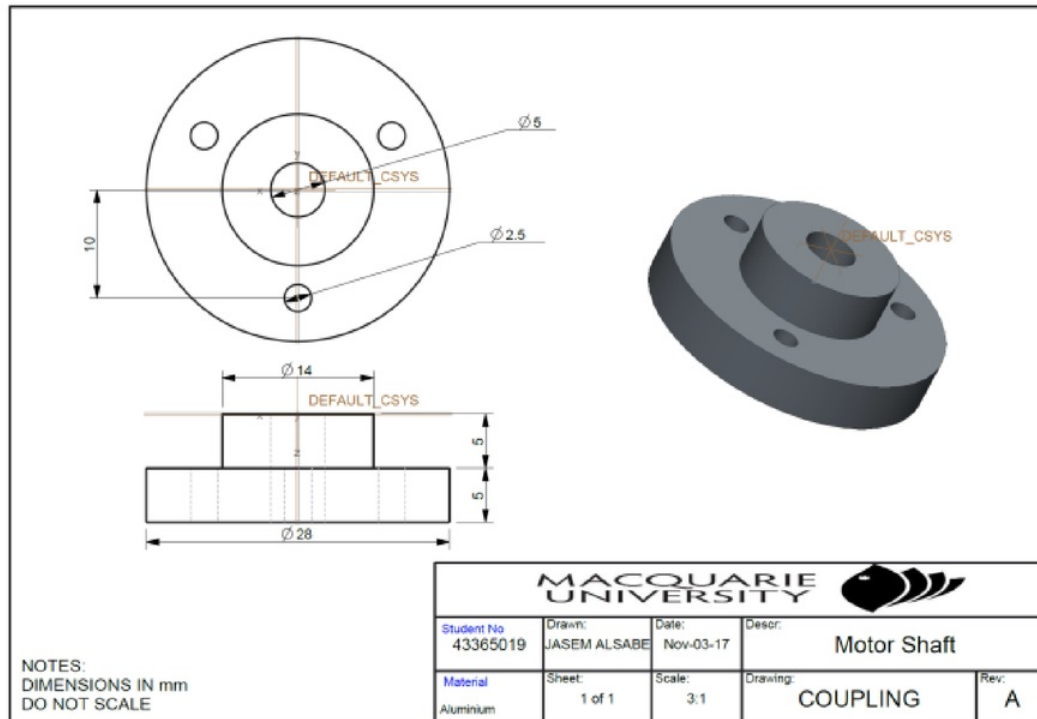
Manufacturing drawing of the motor shaft coupling part.
